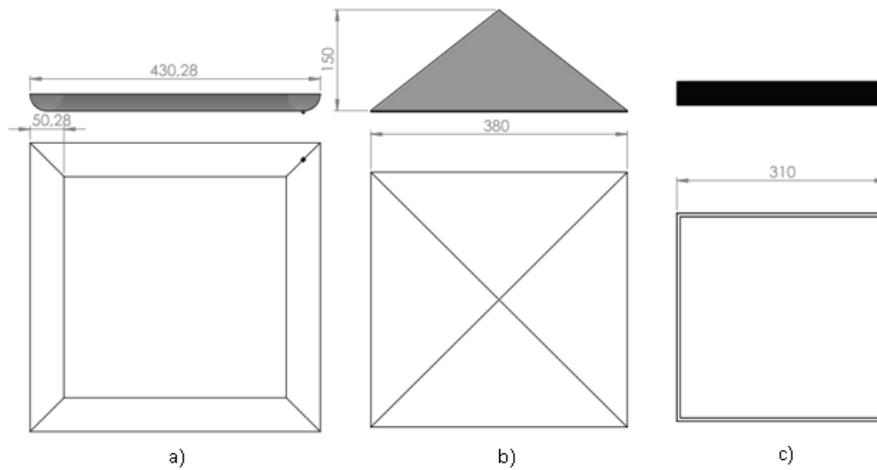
Dimensions of the desalinator - a) gutter; b) glass cover; c) the cake form.
